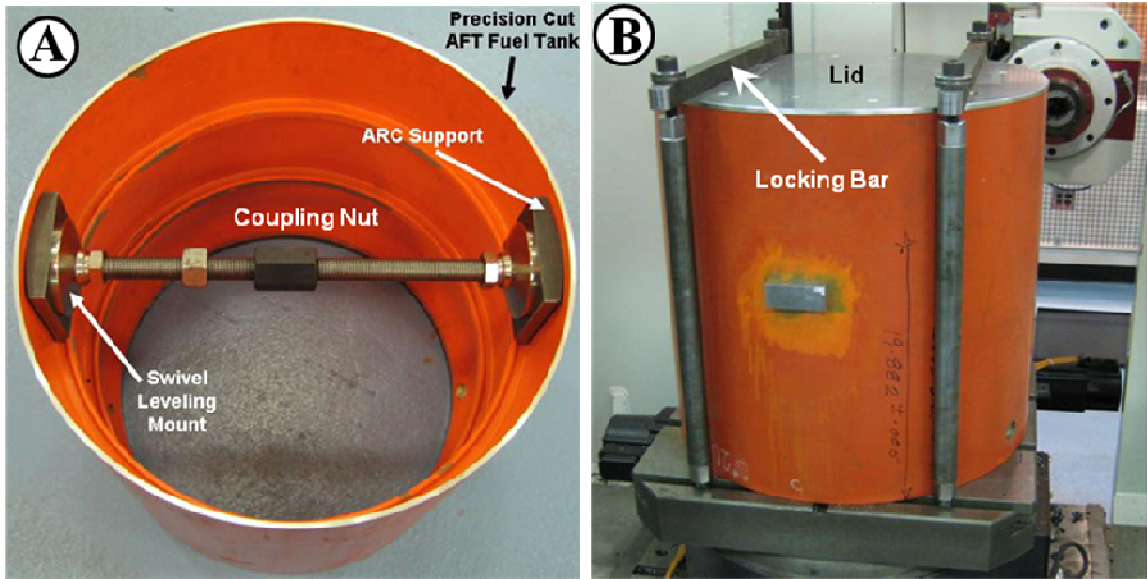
(A) Back-up fixture to support the plug during FSP. Back-up fixture consists of two steel arc-supports, two swivel leveling mounts and a coupling nut. (B) The fuel tank is rigidly clamped to the work-table by a locking bar and screws.
